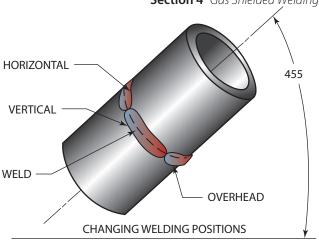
6G pipe welds contain segments that are classified as overhead, vertical, and horizontal.
